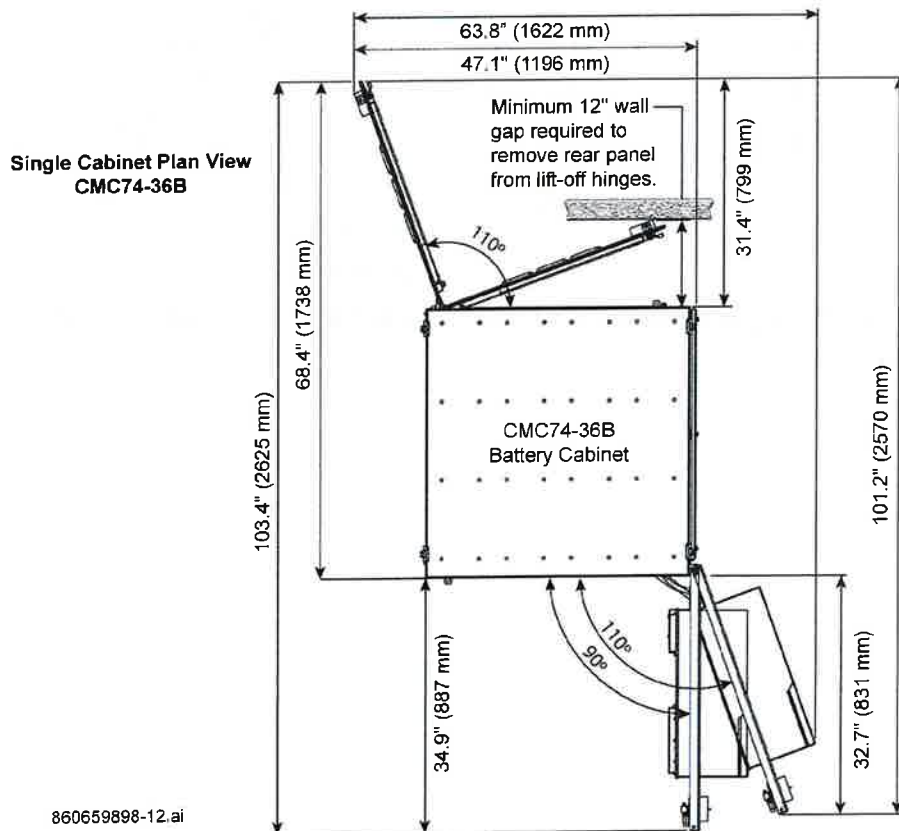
Top View, CMC74-36B Cabinet, Front Door and Rear Access Panel Open
